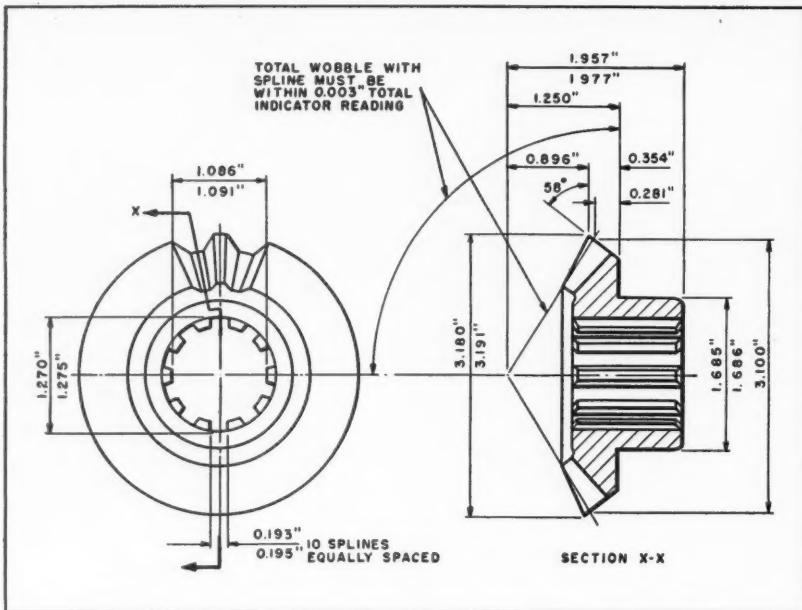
Differential side gear for automobiles and trucks in which sixteen teeth are rough- and finish-formed and chamfered at the rate of sixty-two gears per hour on the Revacycle machine seen in the heading illustration
